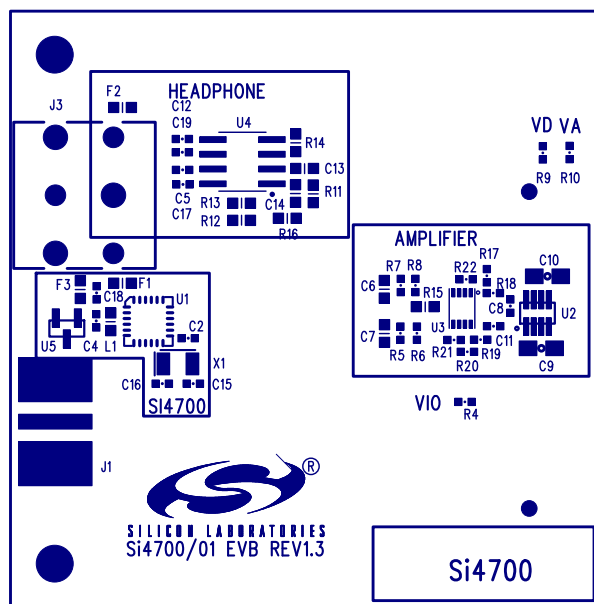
Si4700/01 Daughter Card—Primary Assembly Silkscreen
